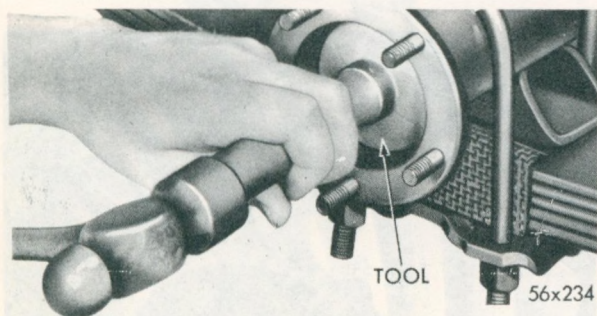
Installation of Axle Shaft Inner Oil Seal with Tool C-839
